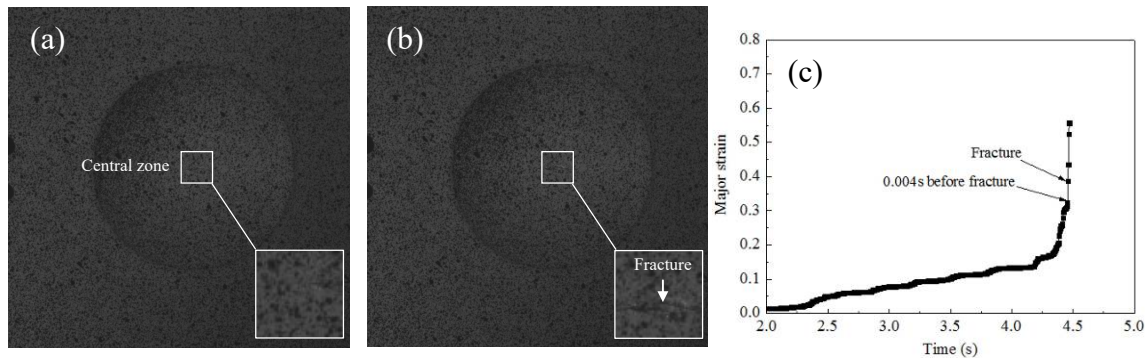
Identification of fracture for AA5086 specimen (reduced side) under biaxial tension: (a) 0.004s before fracture, (b) fracture, (c) Evolution of strain.
